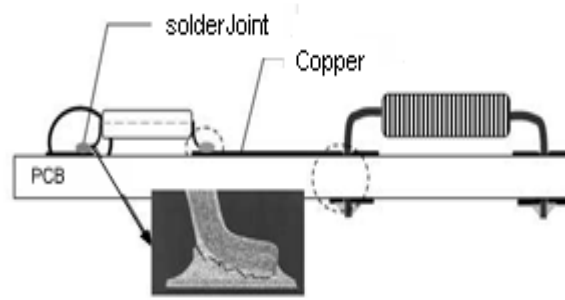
Example of solder joint failure (the most frequent type of failure under vibration loading).
